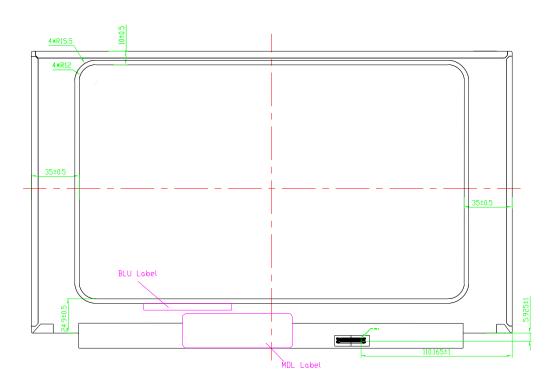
TFT-LCD Module Outline Dimension (FrontView)
